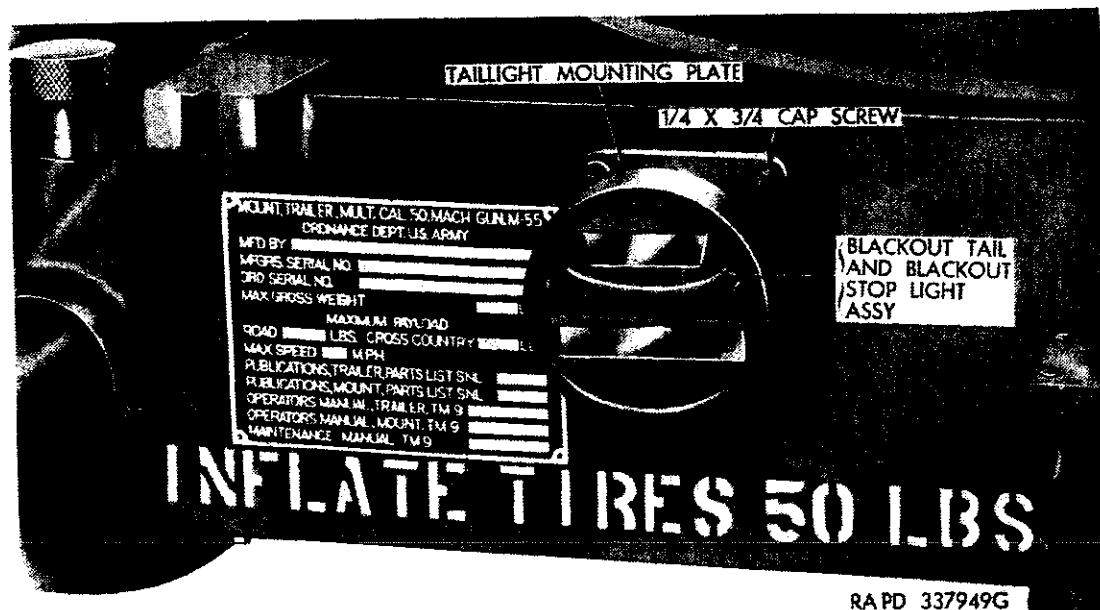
Blackout tail and blackout stop light assembly mounted on trailer.
